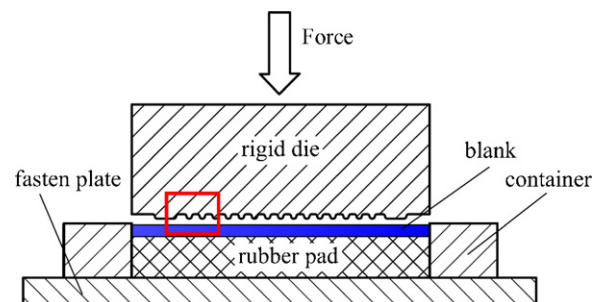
Sketch of the equipment used for bipolar plate fabrication by the rubber pad forming.
